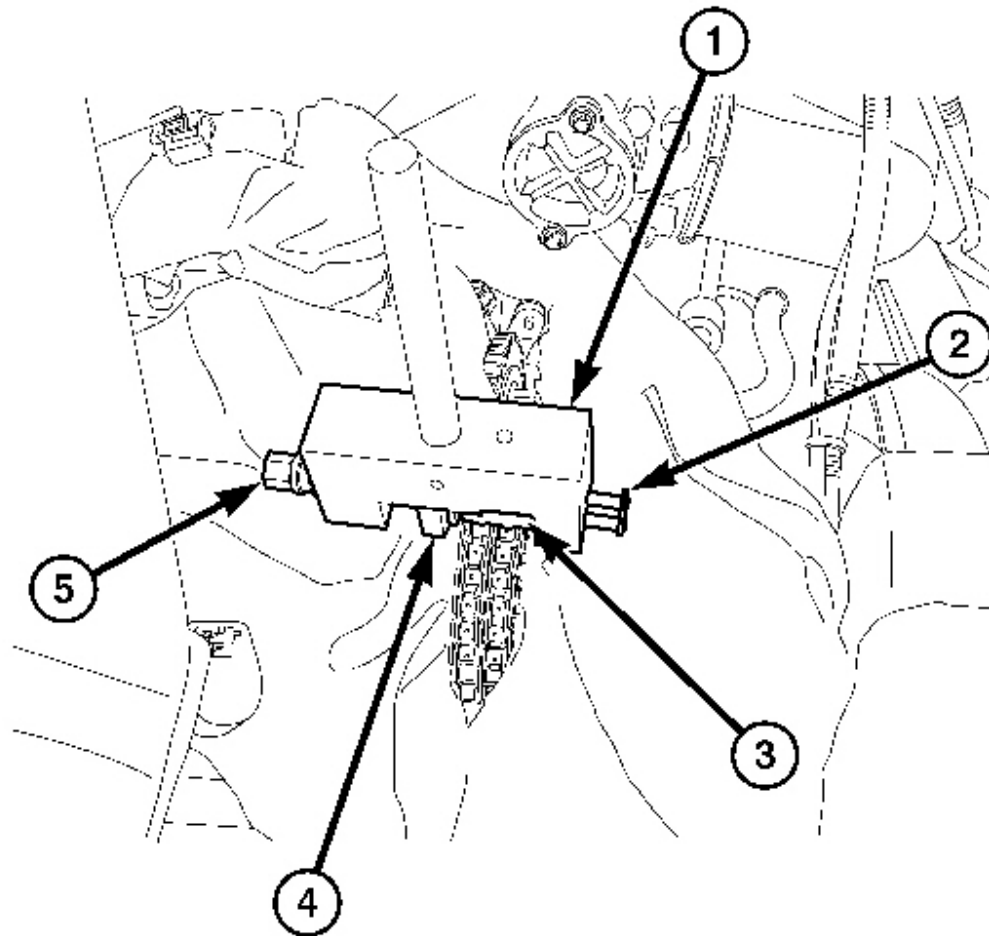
Installing Assembly Inserts Into Riveting Tool
